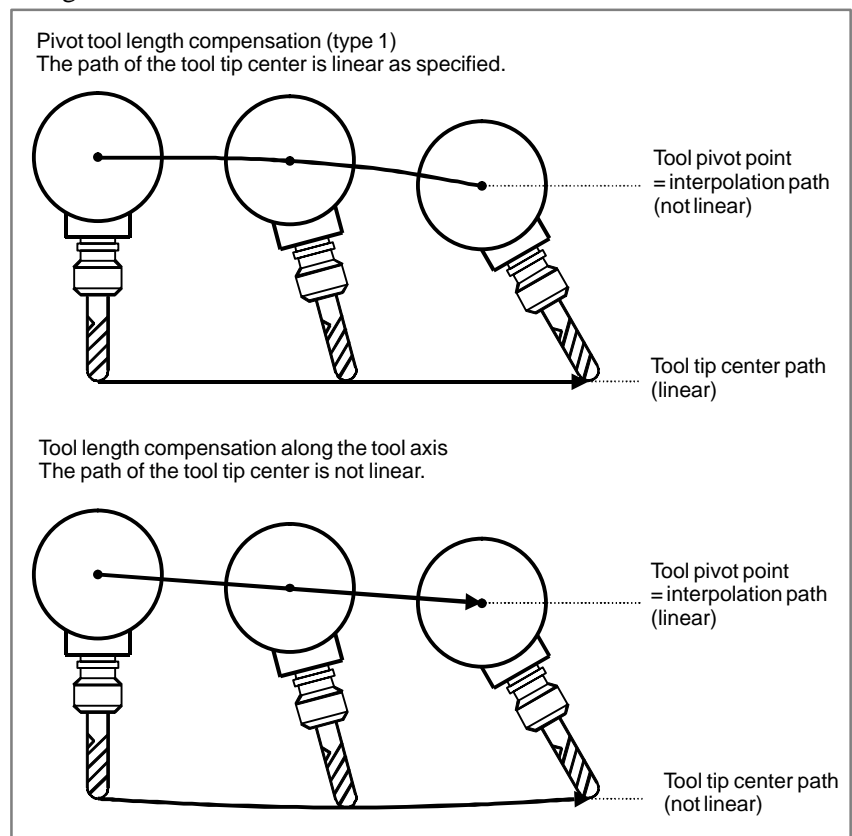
Difference between Tool Center Point Control and Tool Length Compensation along the Tool Axis
